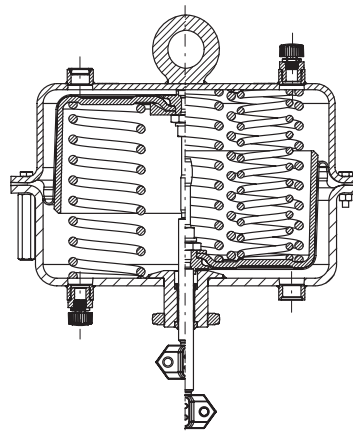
· Sectional drawing of Type 3271 Actuator with 1000 cm²
